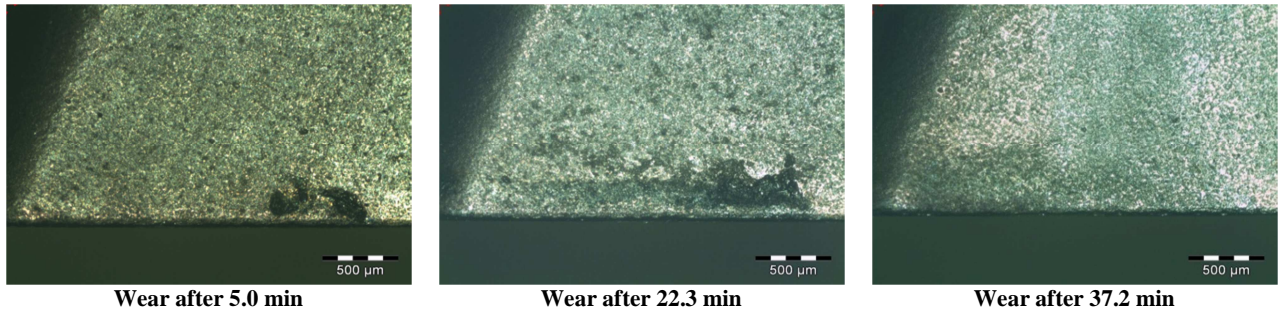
Wear scar progression under air blow cooling (dry cutting) conditions, machining 40CrMnMo7 with the Mitsubishi tool holder
